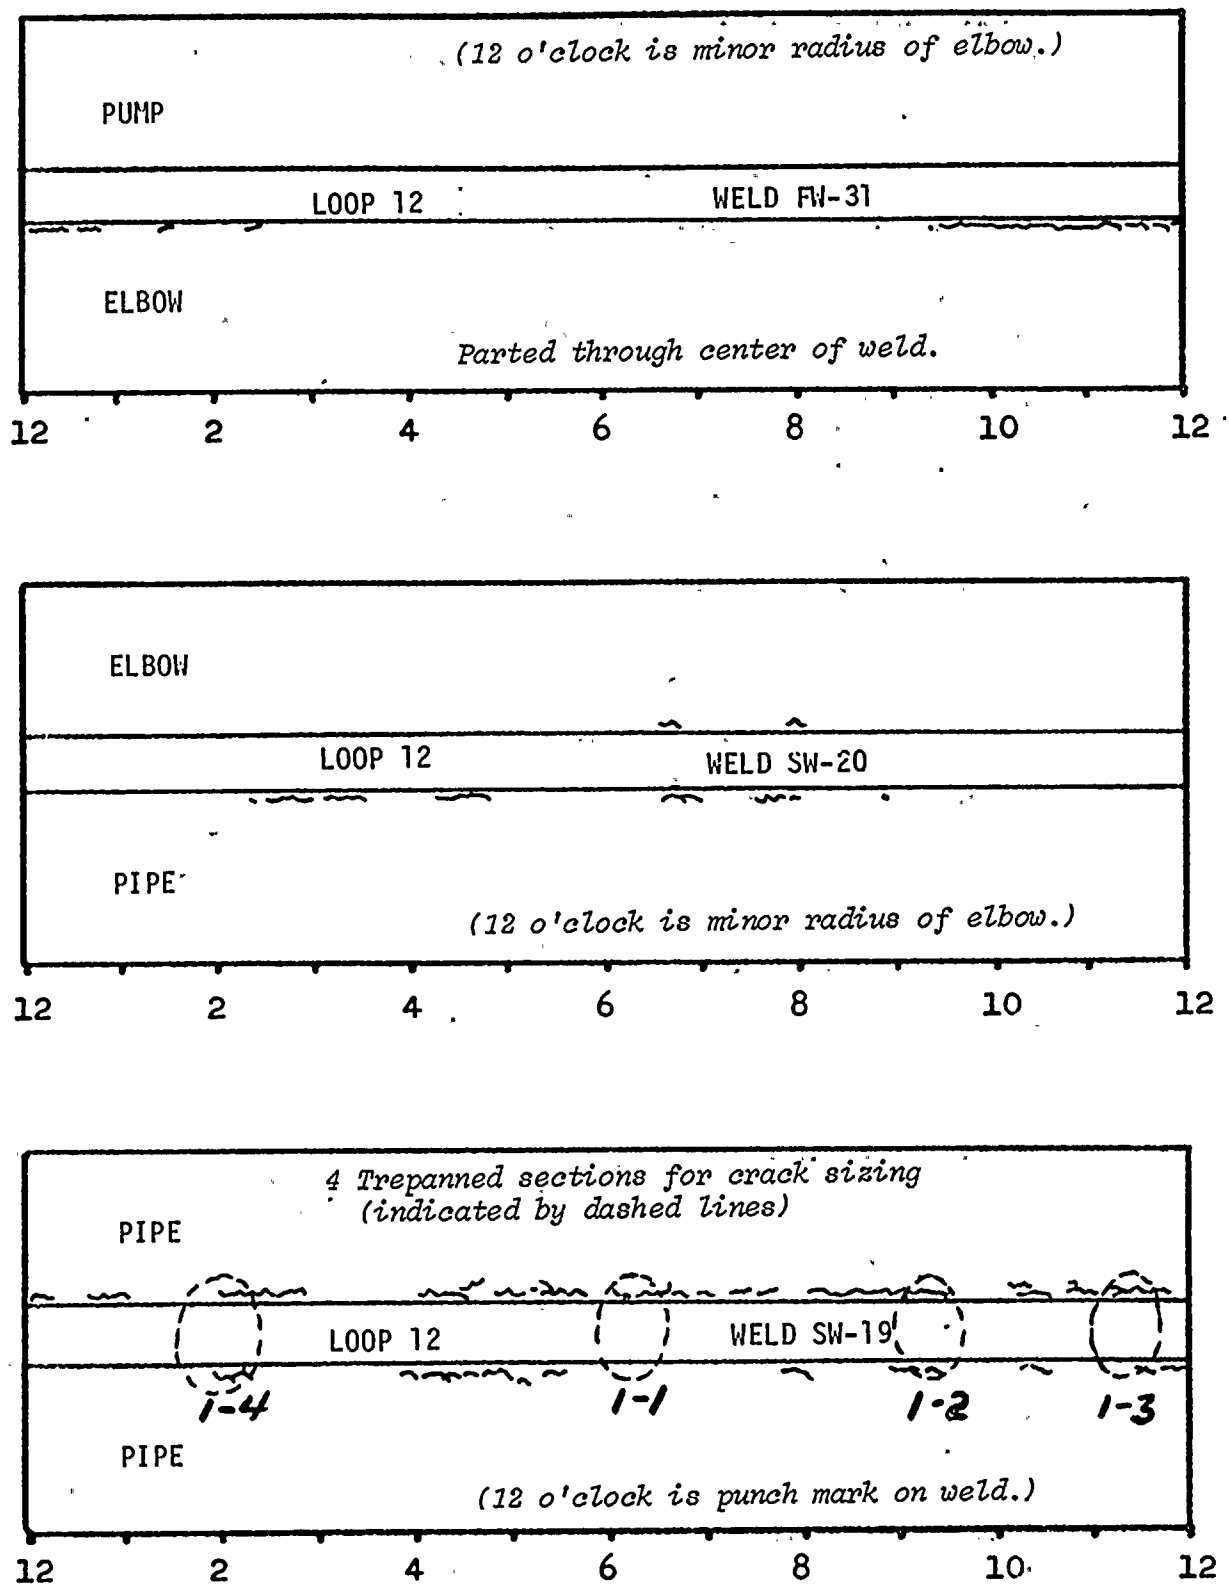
(Continued) Dye Penetrant inspection results, Loop 12 welds.
